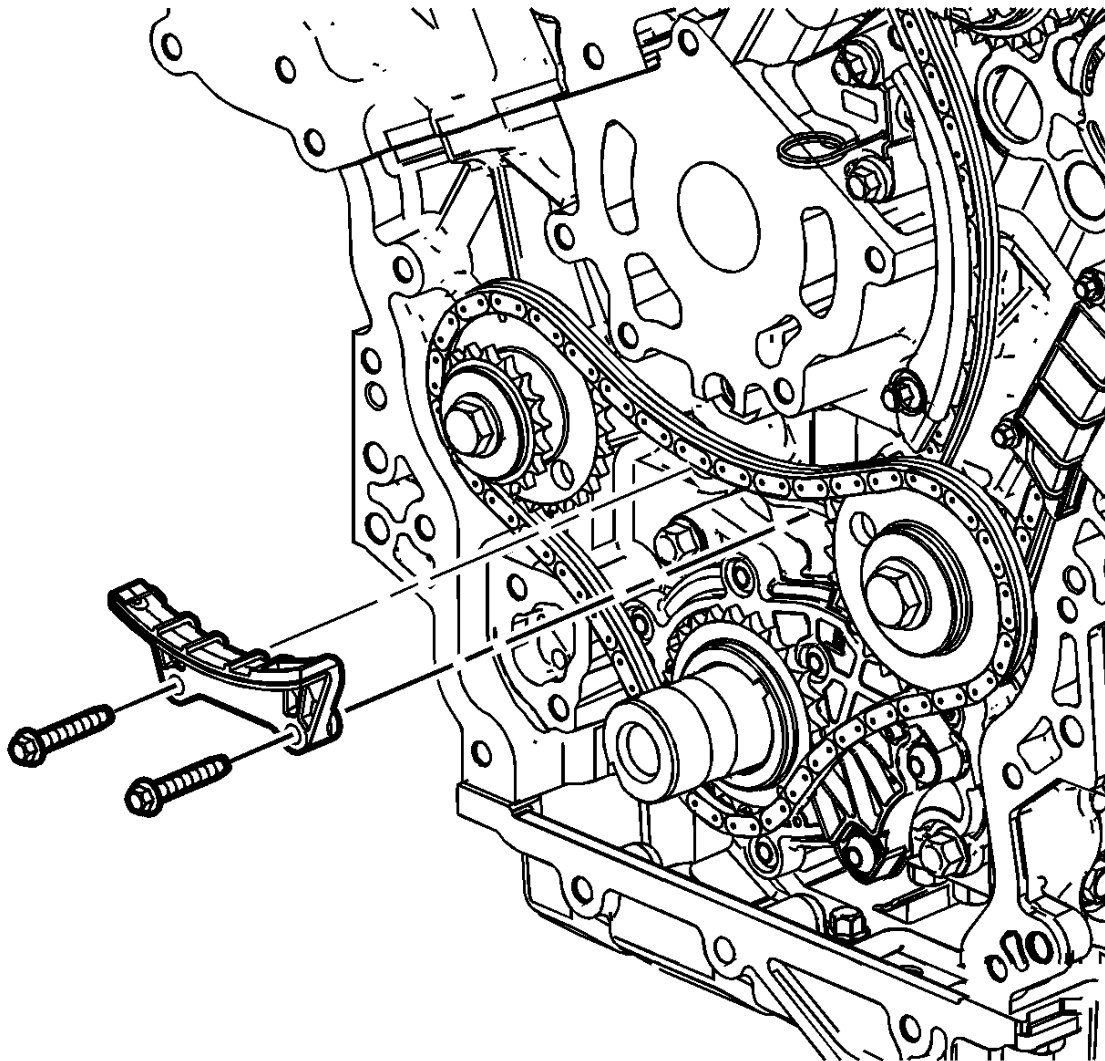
View Of Upper Primary Camshaft Drive Chain Guide
